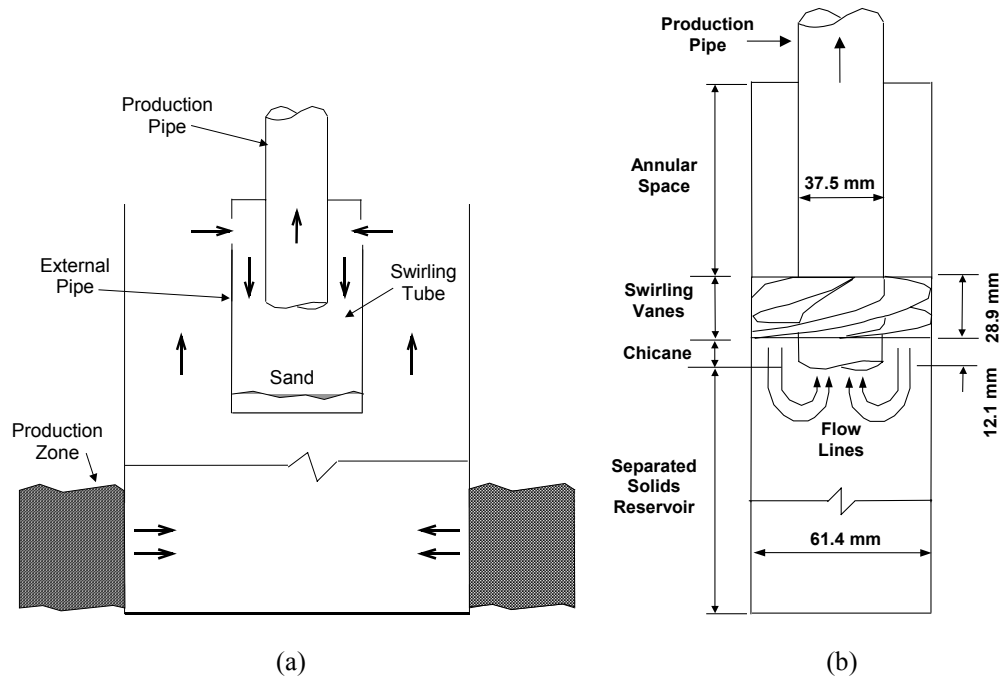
(a) Schematic of swirl tube inside the well and (b) swirl tube main dimensions.
